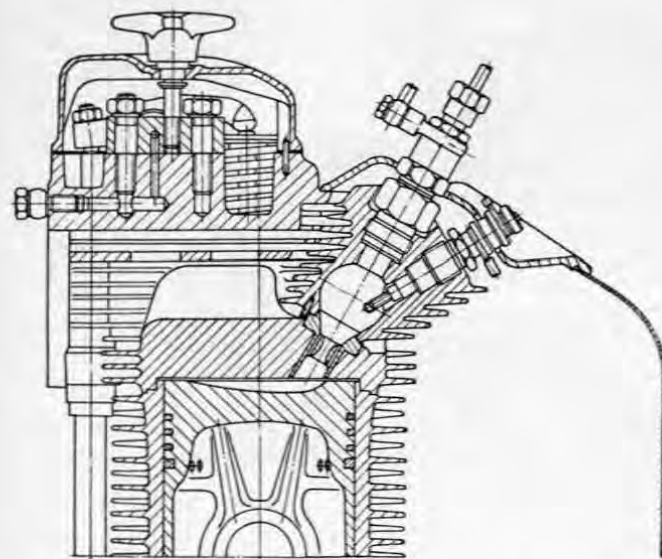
Sectional view of the cylinder head of an MWM engine.
